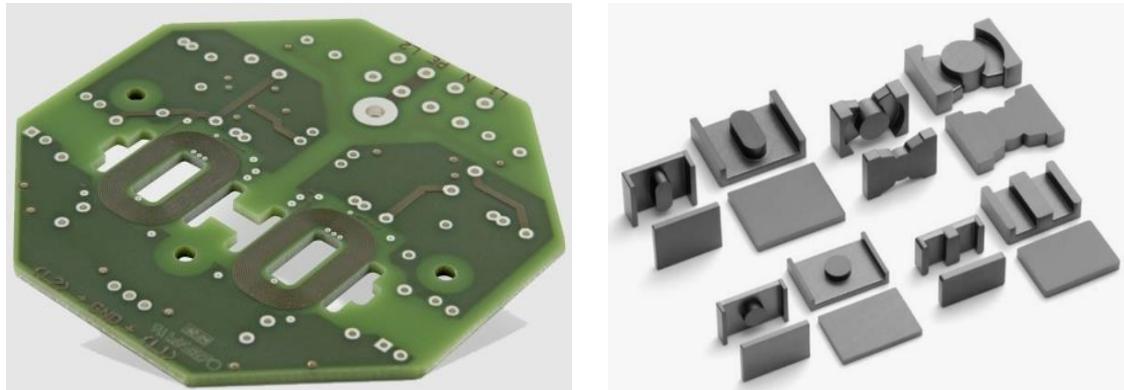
Ferrite preforms (right) for magnetic core inductors for assembly into PCB coils (left) from TDK
